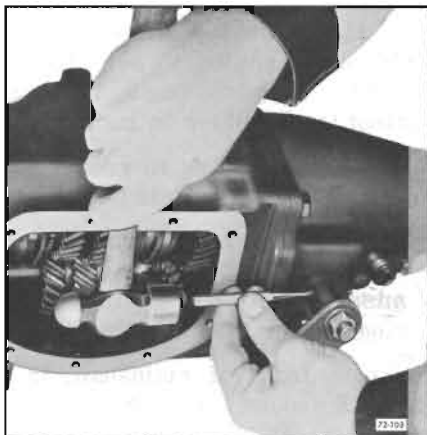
Removing Reverse Shifter Shaft Lock Pin
